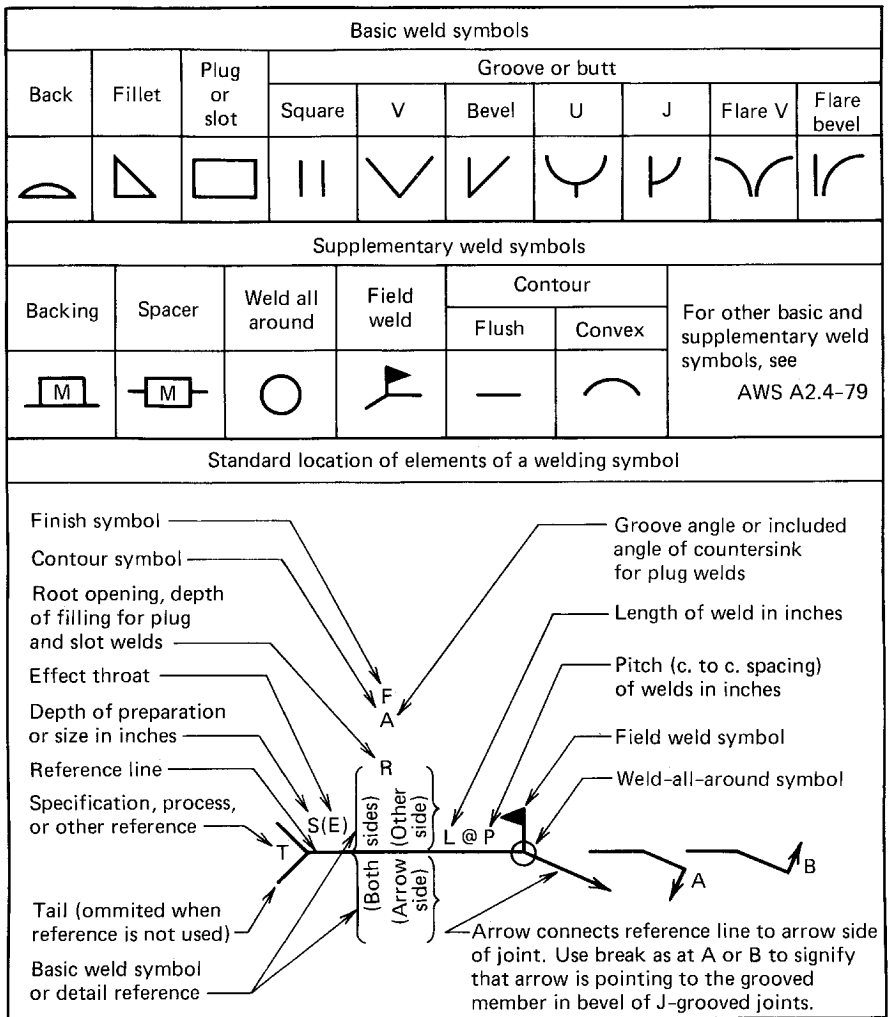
Standard symbols for welded joints.^{8,11}
